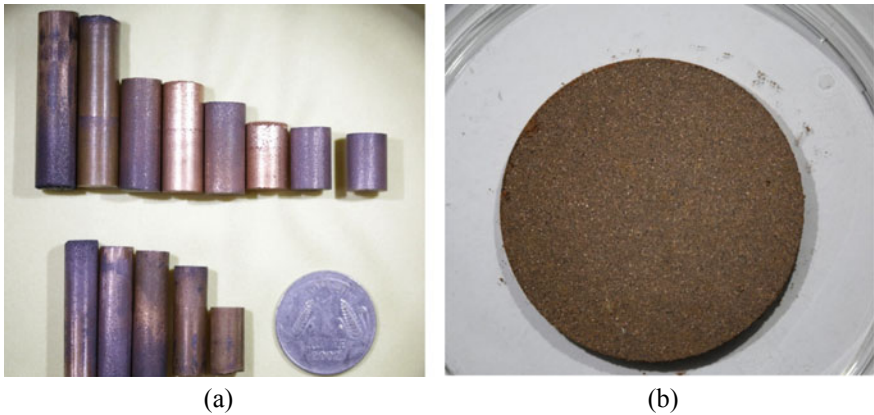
Bi-porous wicks fabricated for loop heat pipes. a Cylindrical-shaped wicks. b A flat disc-shaped wick
